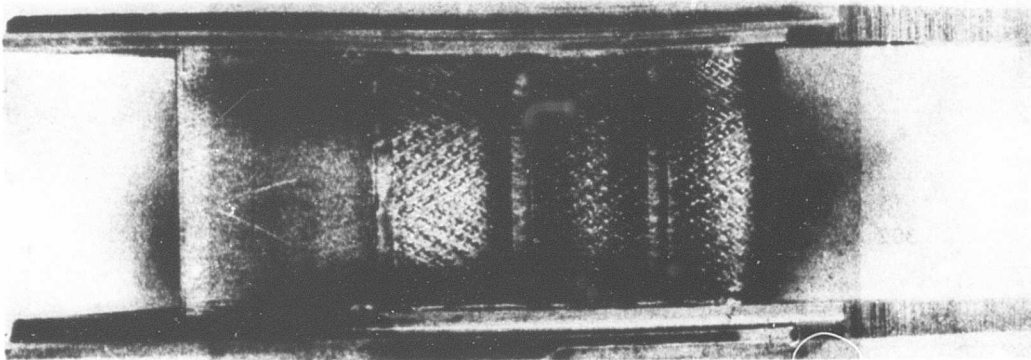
A Welded Concave Side of a Stator Blade.
